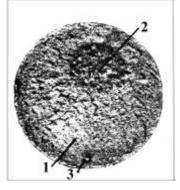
Fracture obtained in failure: 1 -fatigue zone; 2 -after-fracture zone; 3 -point of initiation of a crack
